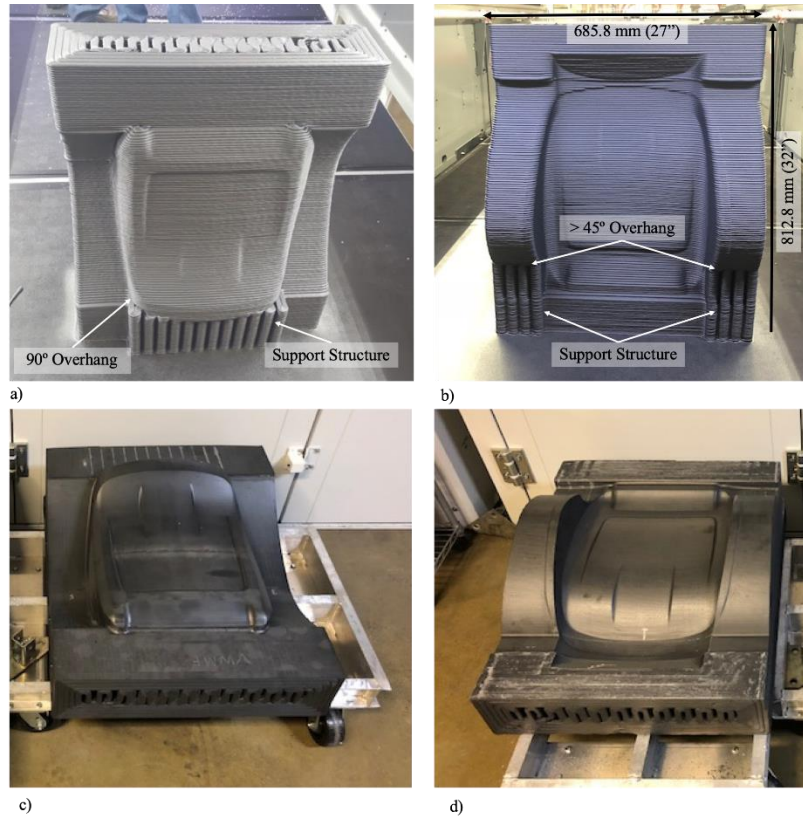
Seat back AM mold; (a) Male mold showing integrated supports for overhang areas, (b) Female mold as-printed, (c) Male mold after machining, and (d) Female mold after machining
